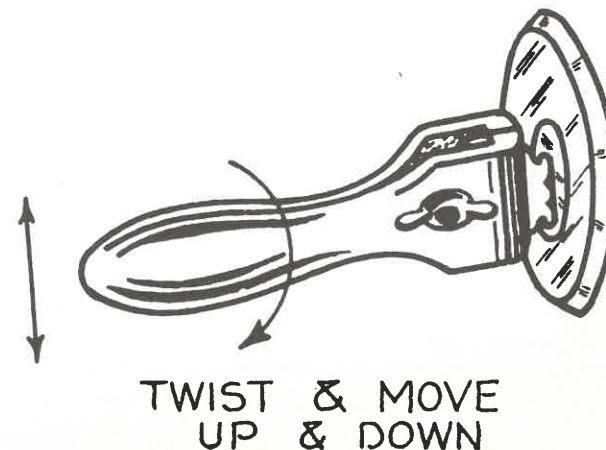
The Blank, Firmly Gripped, Is Twisted and Rocked
